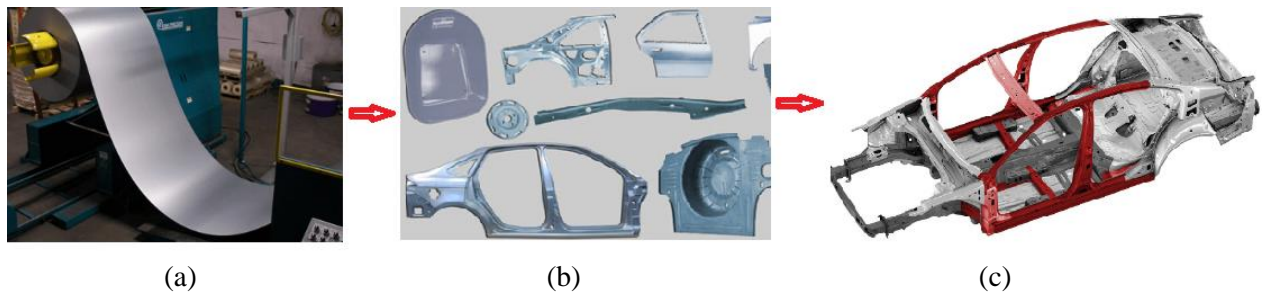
Manufacturing automotive components: (a) coil feeding; (b) stamped component; (c) assembly
